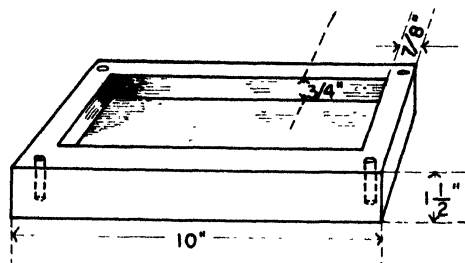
WOOD JIG USED FOR FINAL PREPARATION OF SAMPLES
